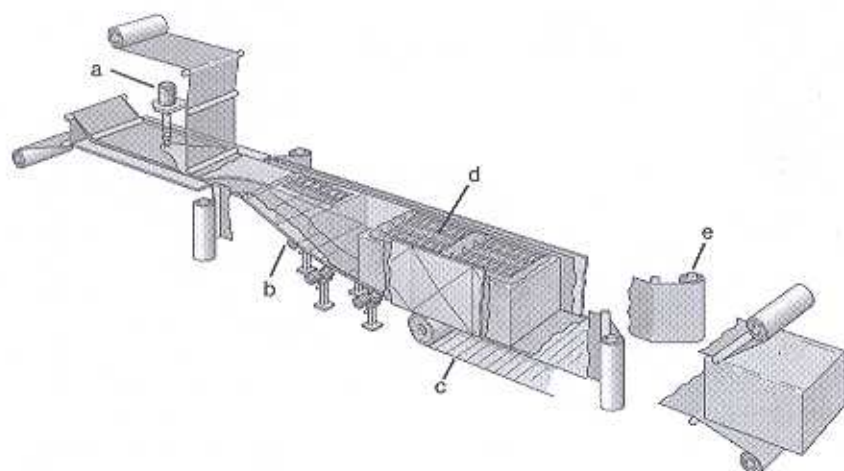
Plant for the manufacture of rectangular slab stocks (Quadro-Foamat-Machine; QFM, source Hennecke) a) Agitator mixing head; b) Fall plate path adapted to foam expansion; c) Conveyor; d) Device to keep block shape rectangular; e) Paper winch
